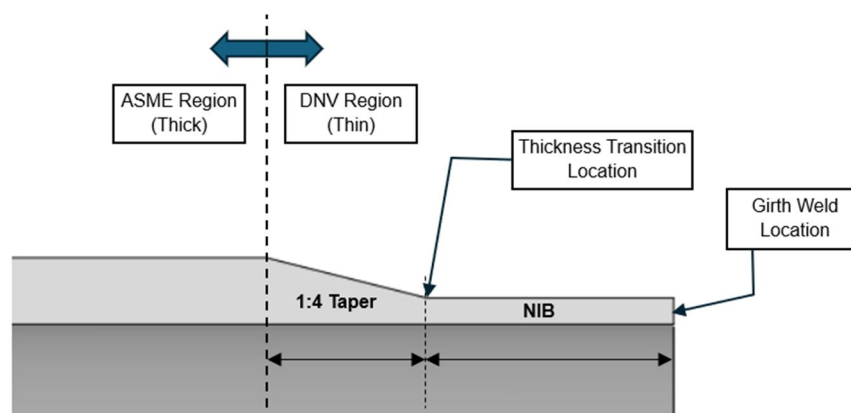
Tapered transition forging geometry per DNV-ST-F101 §5.6. The NIB ends the girth weld; the code break is at the taper-to-body junction. The 1:4 (minimum) taper is on the outer surface only. The constant bore is maintained throughout for pigging.
